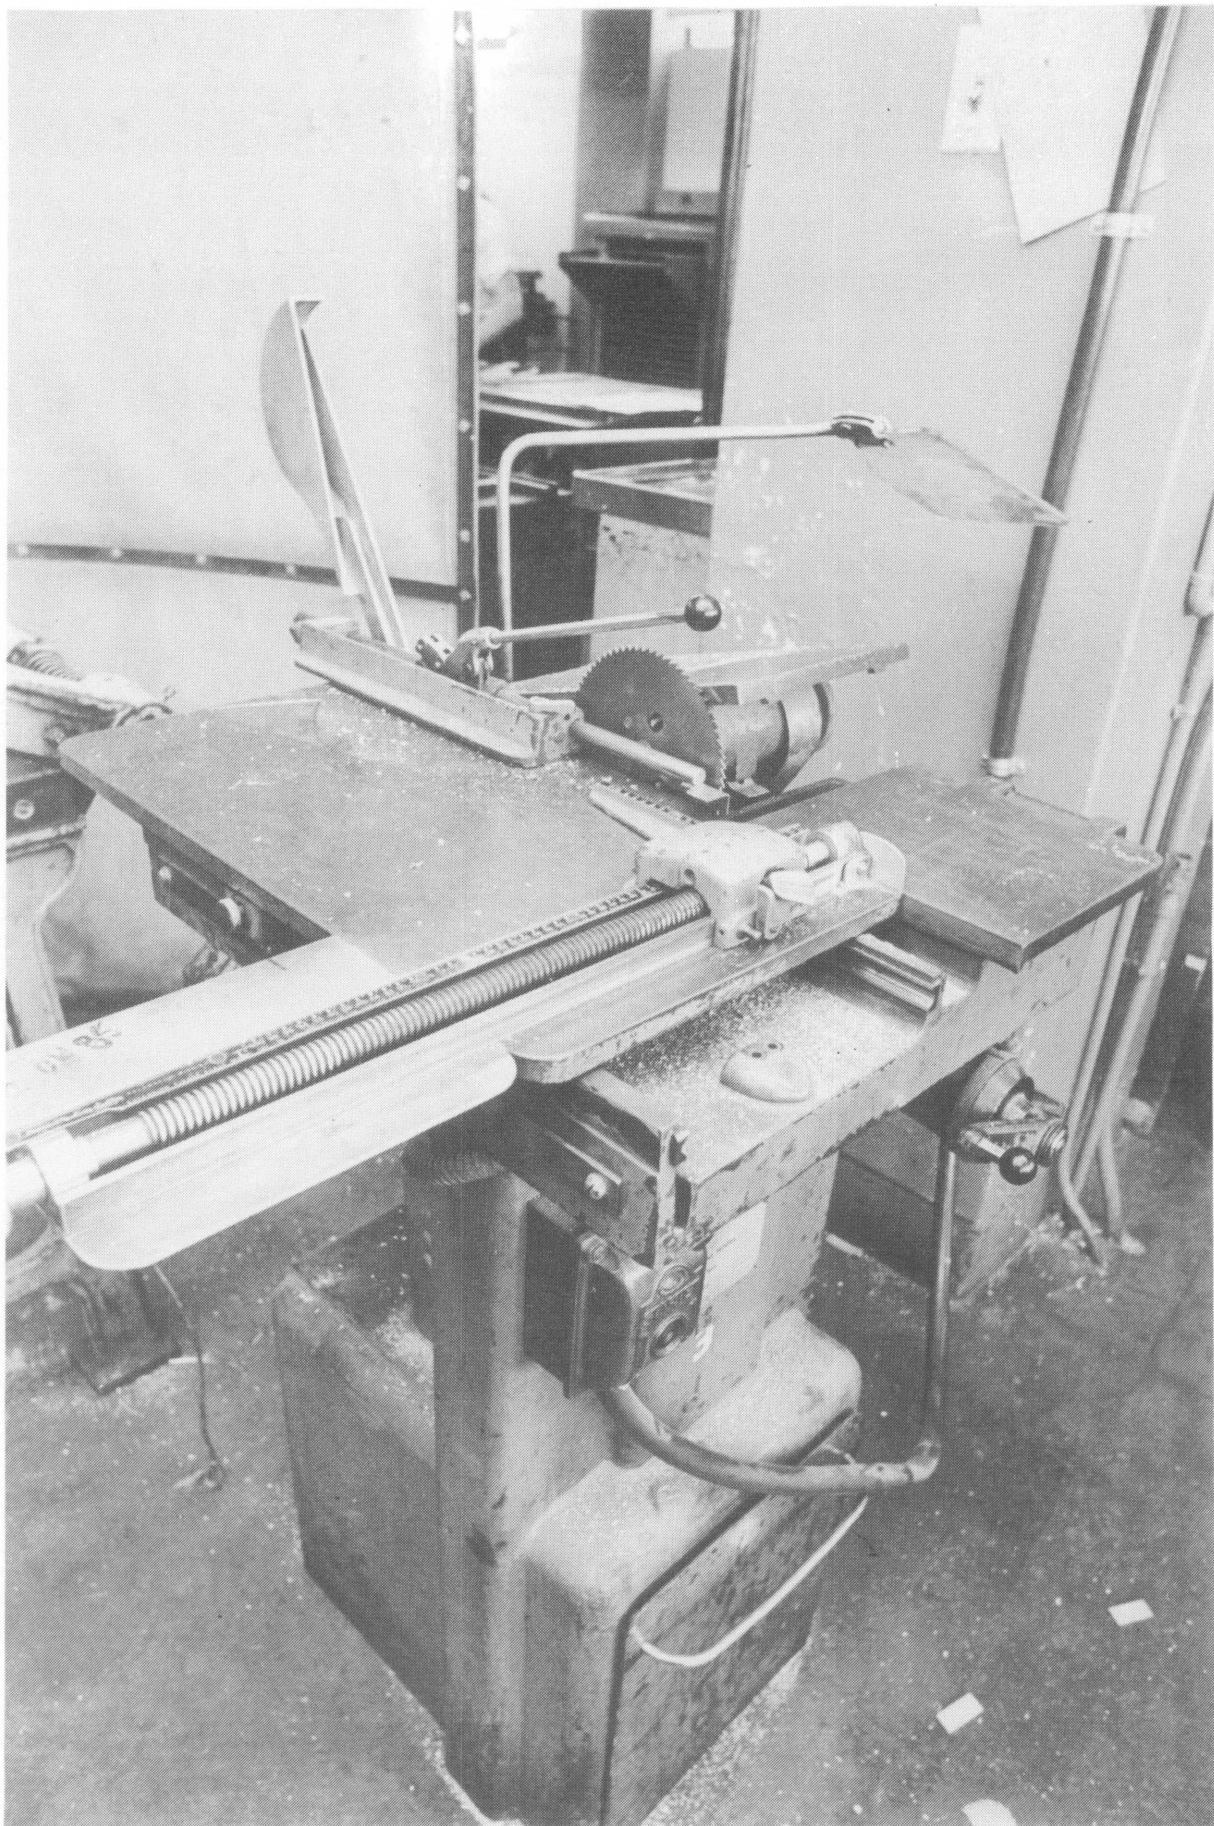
Circular saw used to cut slugs of metal from the linotype and linecasting machines.
